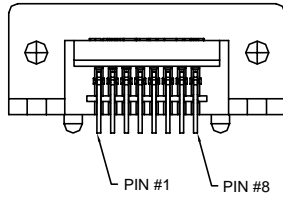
SR4210PCB Board-Mount Orthographic Drawing
